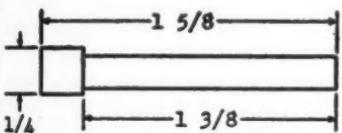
Here the Length of the Turned Part Determines the Size of Machine to be Used
